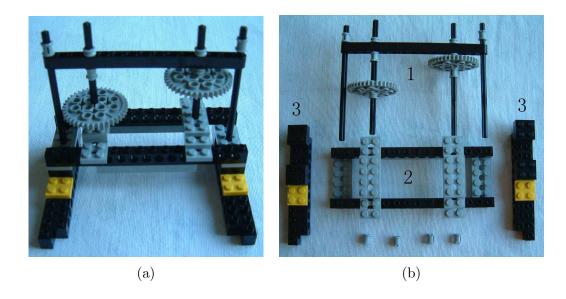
Module 2: (a) the upper part assembly; and (b) the submodules in this assembly
